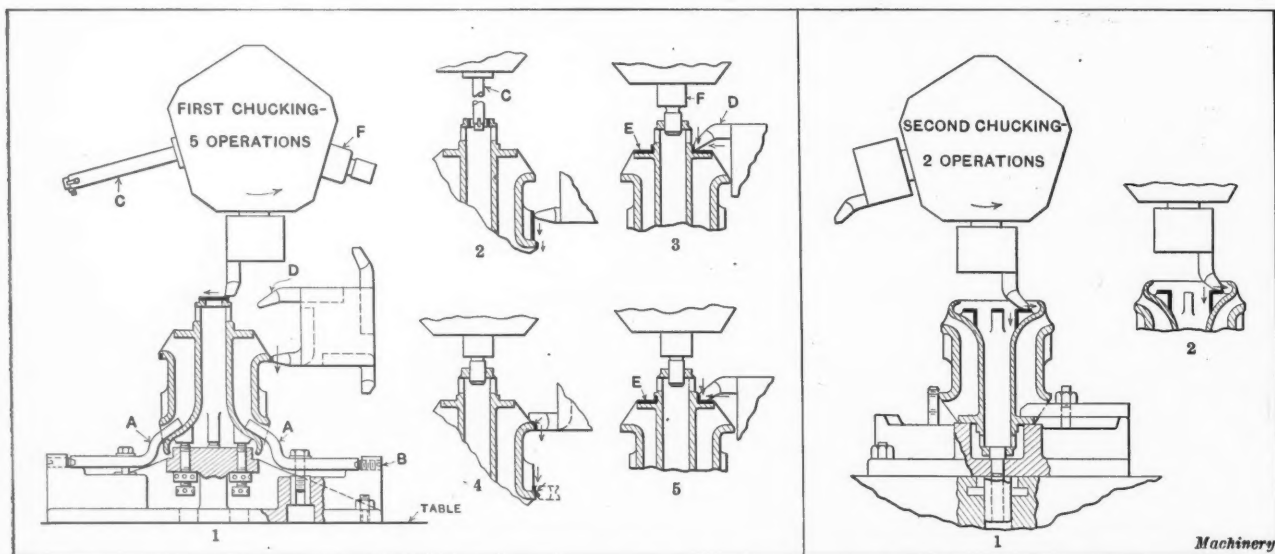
Tooling Lay-outs for machining a Locomotive Valve Body. Attention is called to the Special Holding Means employed
